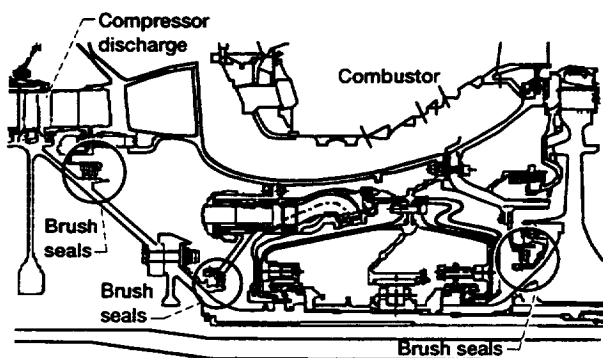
Brush seals used in PW4168 engine. (Mahler and Boyes, 1995).
